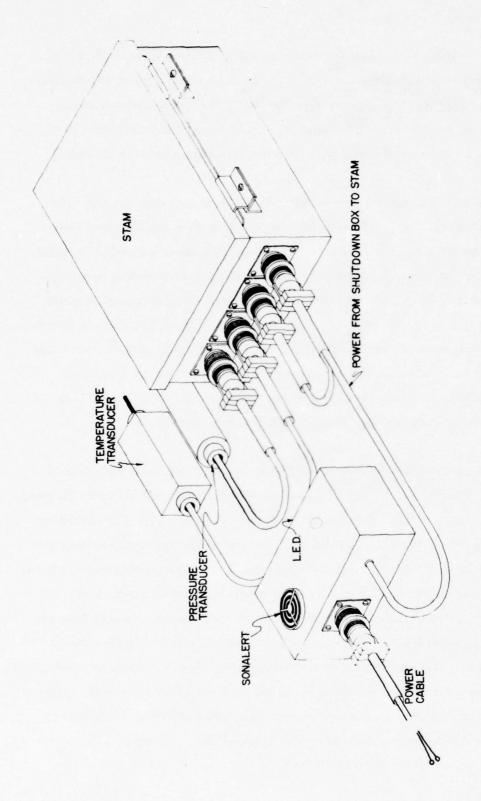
STAM Assembly with End-of-Test Annunciator.
